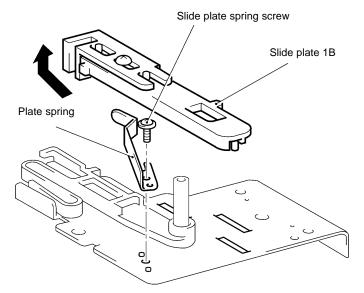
Disassembling the Dial Switch Holder Assy B (2)
